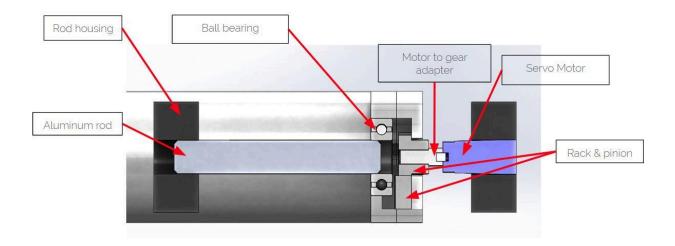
The cross-sectional view of each component of the linear locking mechanism
